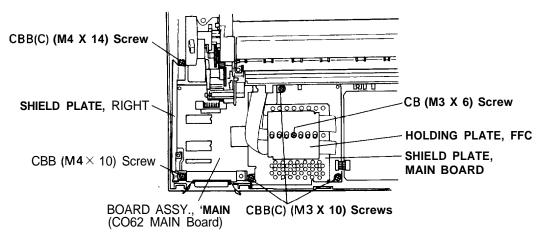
Removing the SHIELD PLATE, MAIN BOARD
